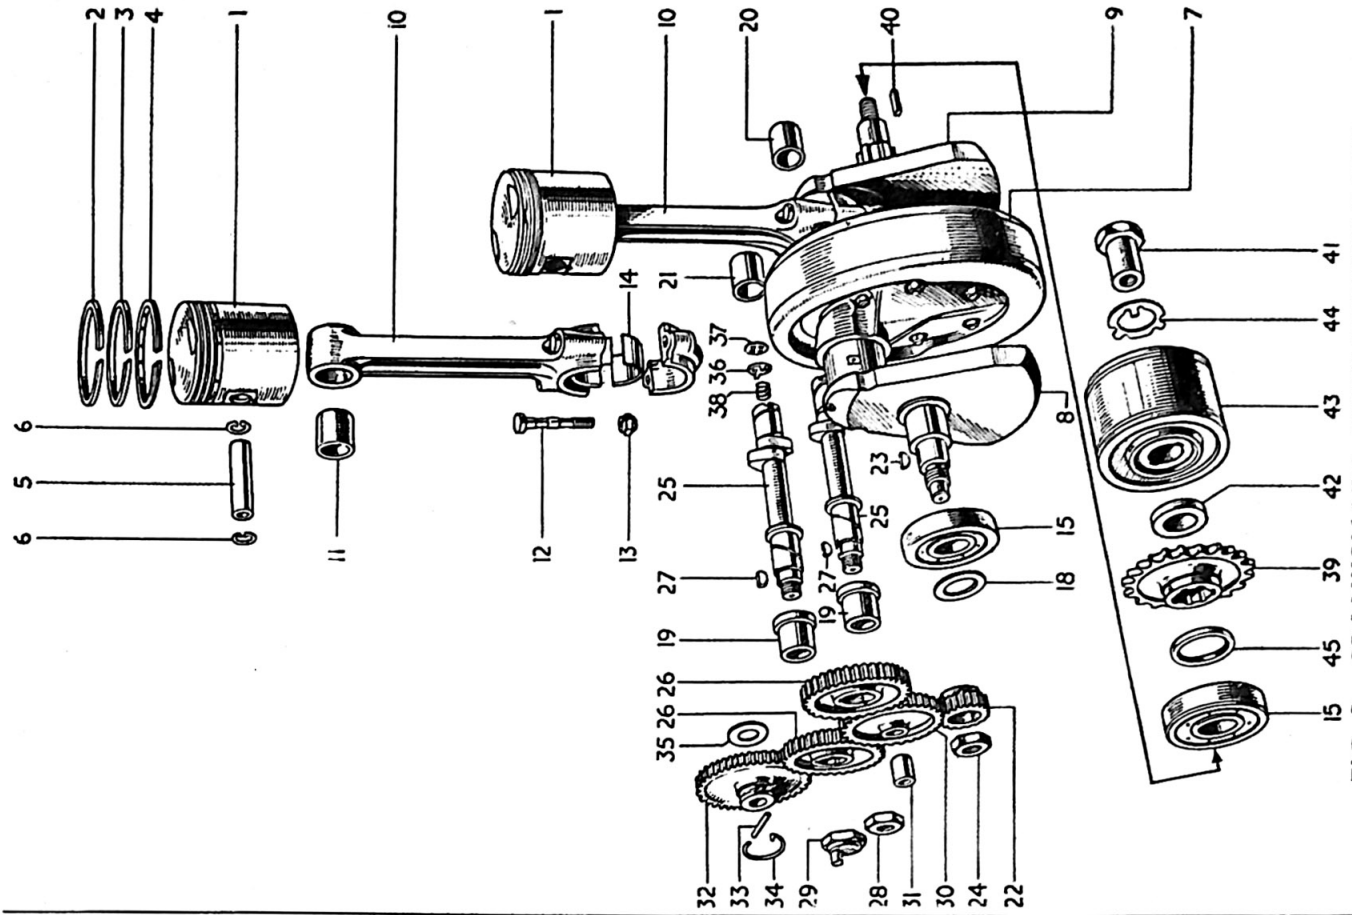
CRANKSHAFT, CONNECTING RODS, PISTONS, TIMING GEAR, etc.
